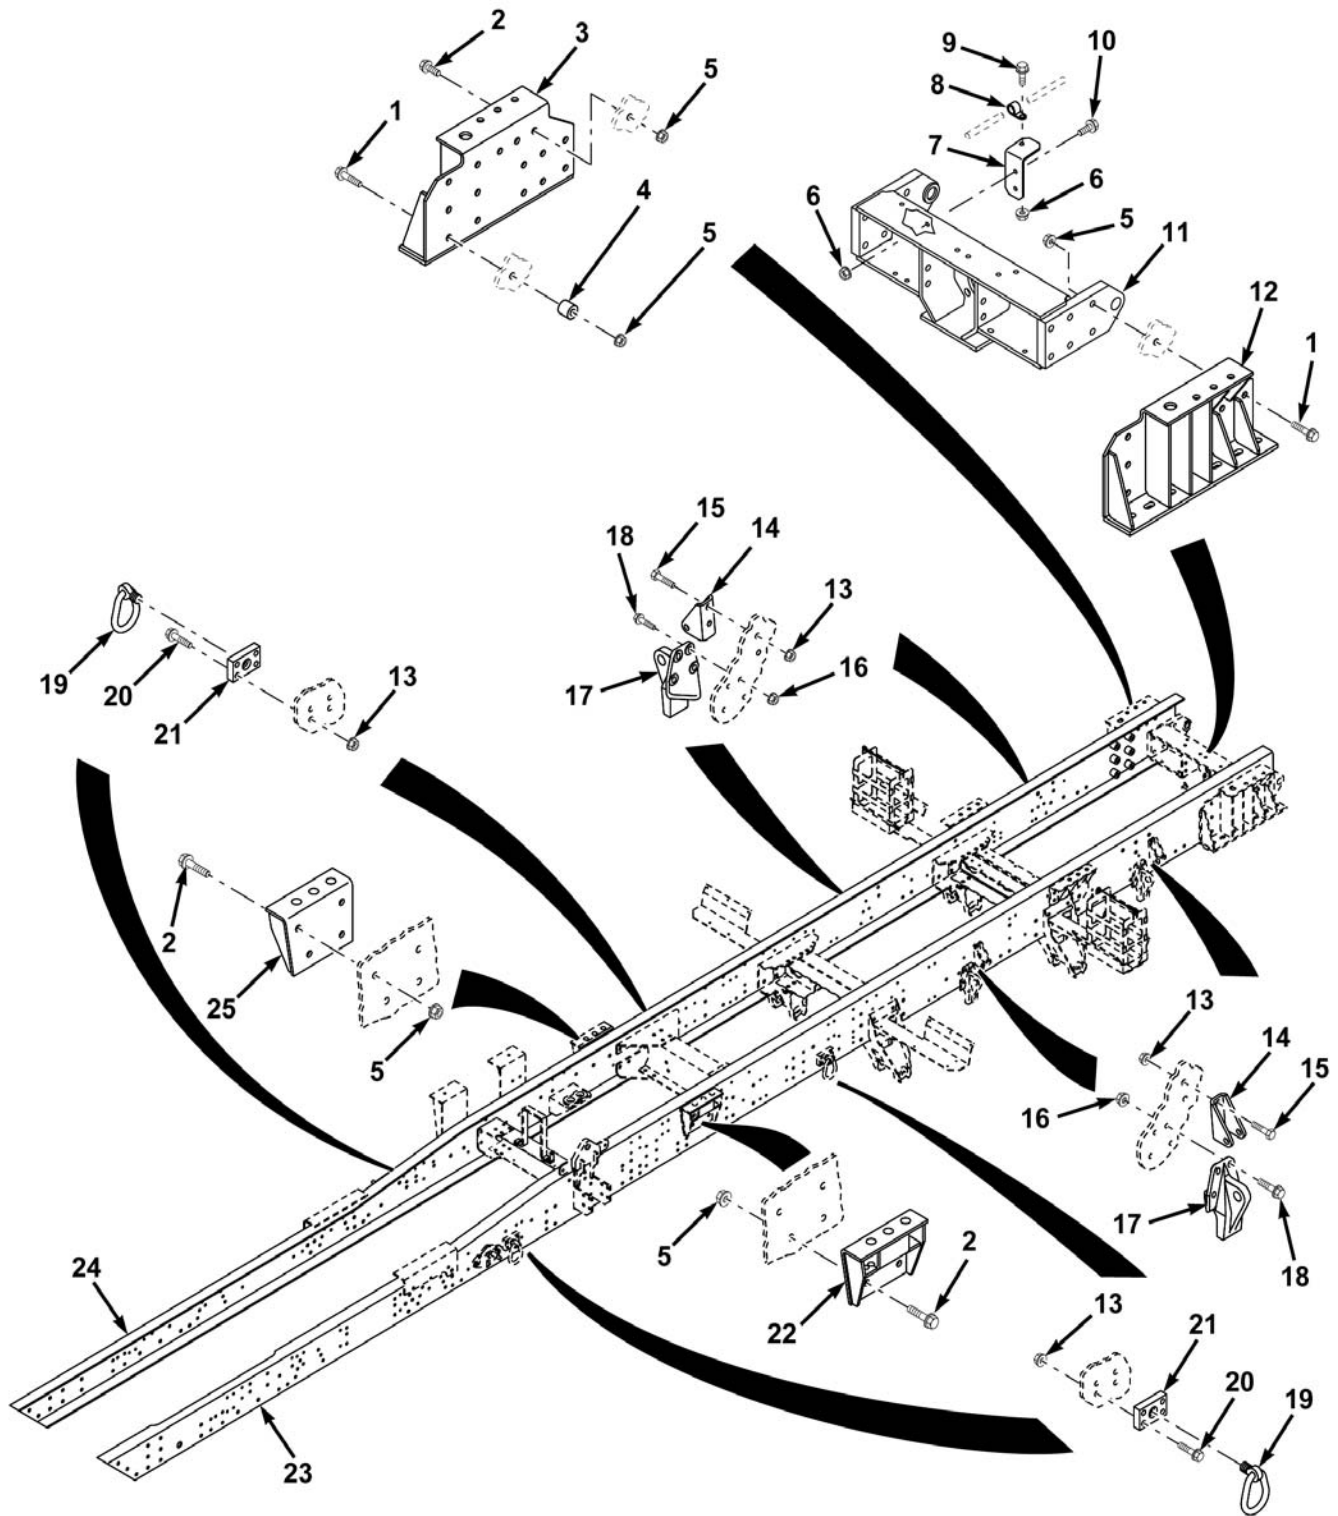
FRAME ASSEMBLY (SHEET 1 OF 5)
